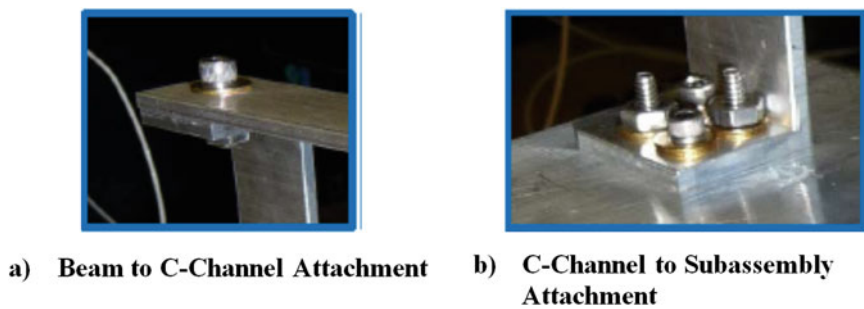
Fastener detail [1]. (a) Beam to C-channel attachment. (b) C-channel to subassembly attachment
